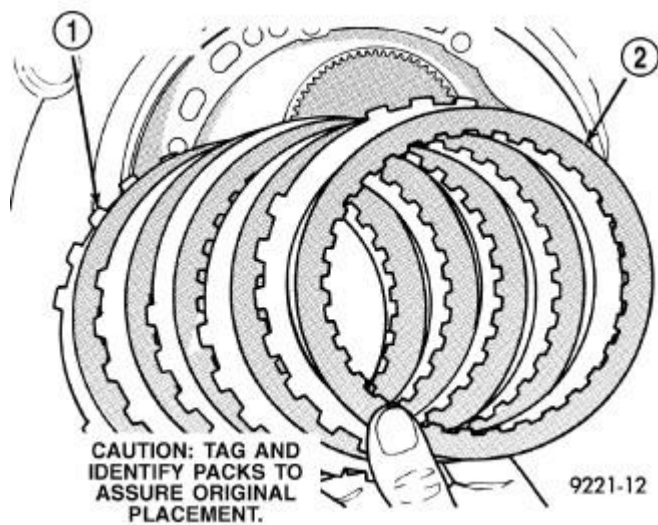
Remove/Install Low/Reverse Clutch Pack
